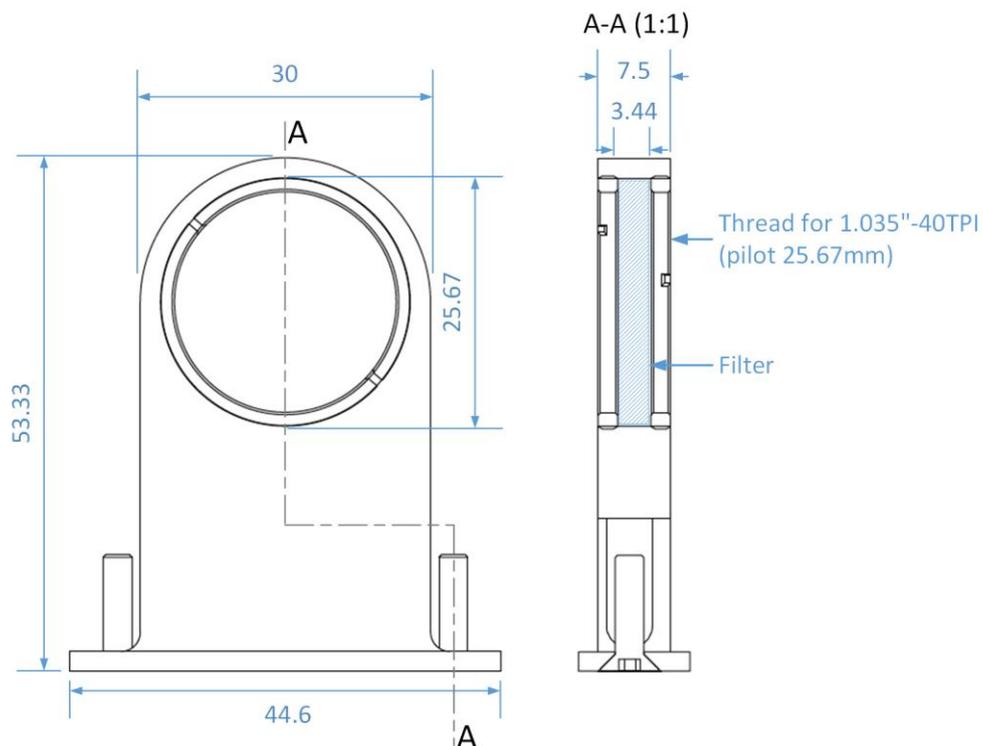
Front and side views of the filter holder along with its dimensions (all dimensions are in millimeter). The optical filter will be placed between two retaining rings, as indicated. The filter diameter is 25.4mm and maximum thickness is 3.44mm.
